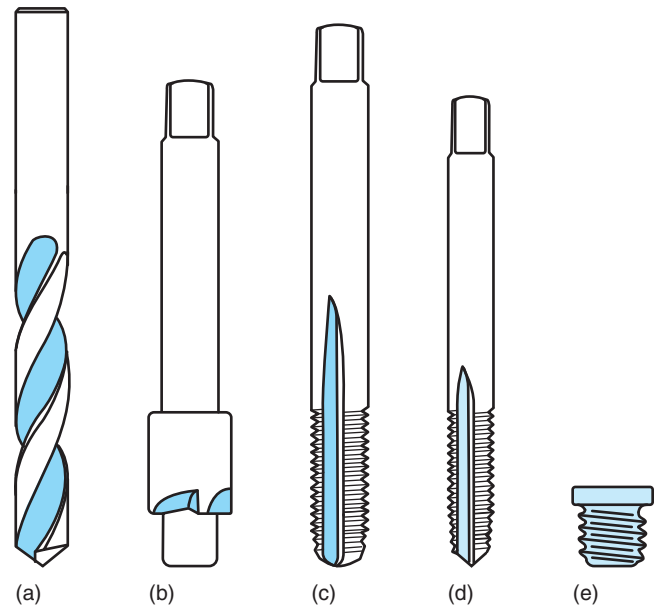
A Timesert[®] kit includes the drill (a), the recess cutter (b), a special tap (c), the installer (d), and the Timesert[®] threaded bushing (e).
